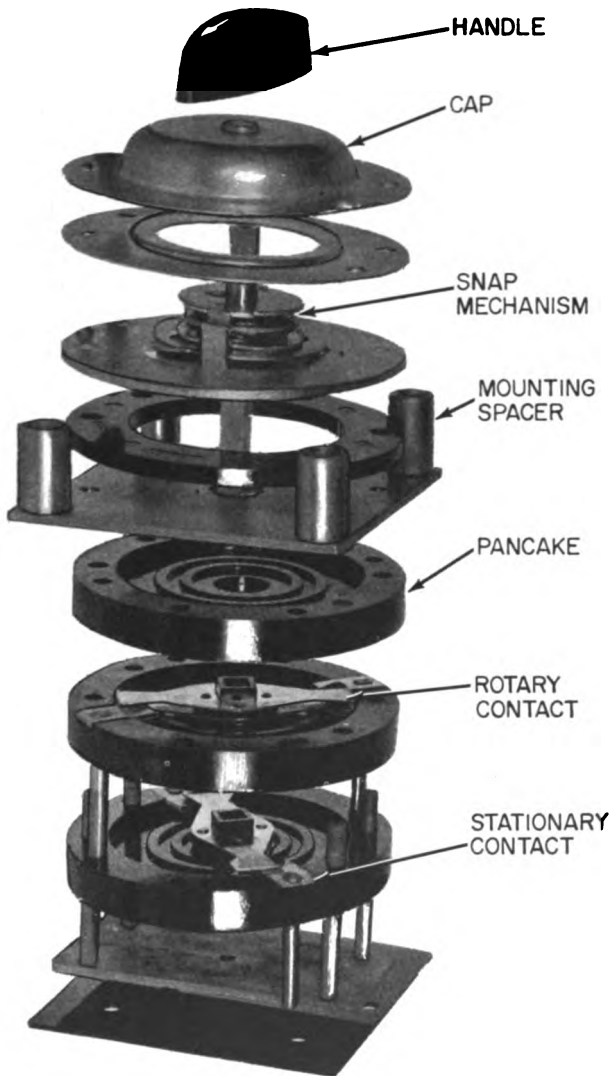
Type SR snap switch—exploded view (60 ampere size 6SR).
